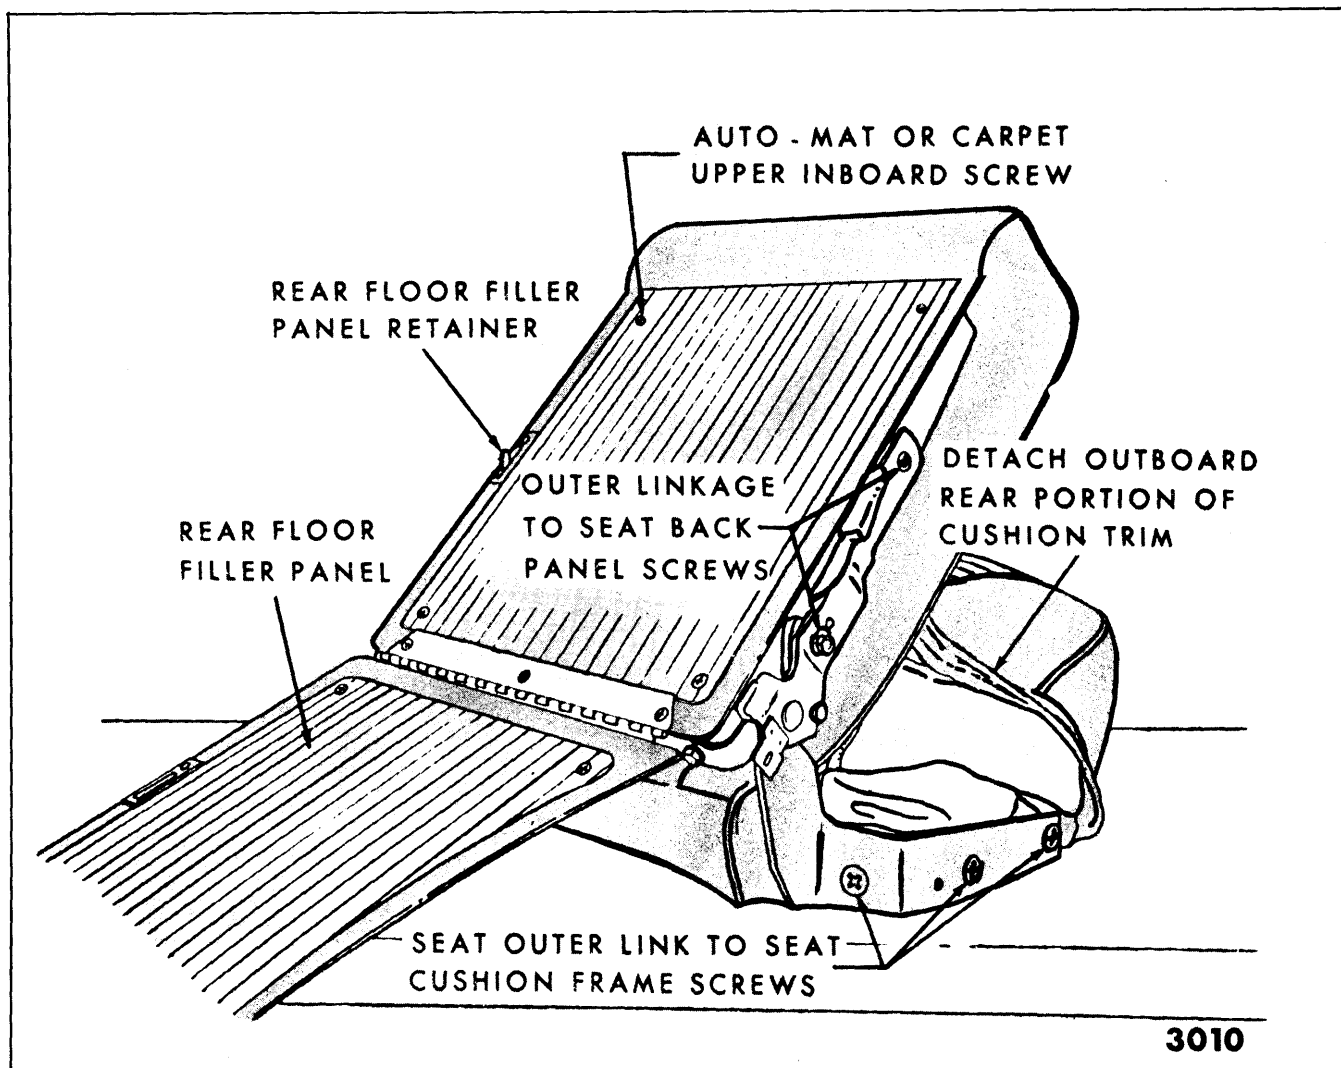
Folding Second Seat Cushion Assembly (Right or Left Side) - Vista Cruiser and Sport Wagon Styles
